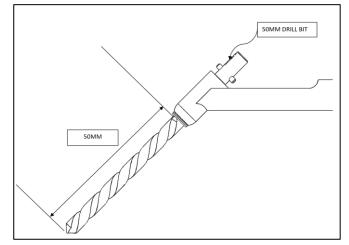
Short Side of Non-Locking Drill Guide Measurements with 50mm Drill
